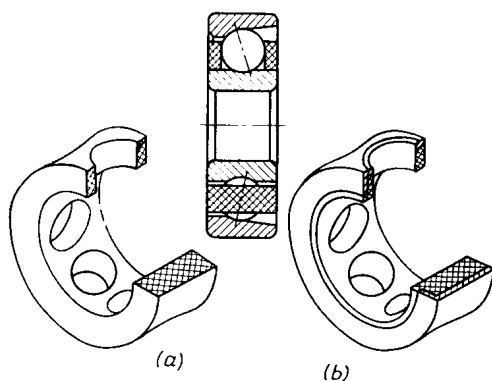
Angular-contact ball bearing with retainer made of self-lubricating material AMAH
